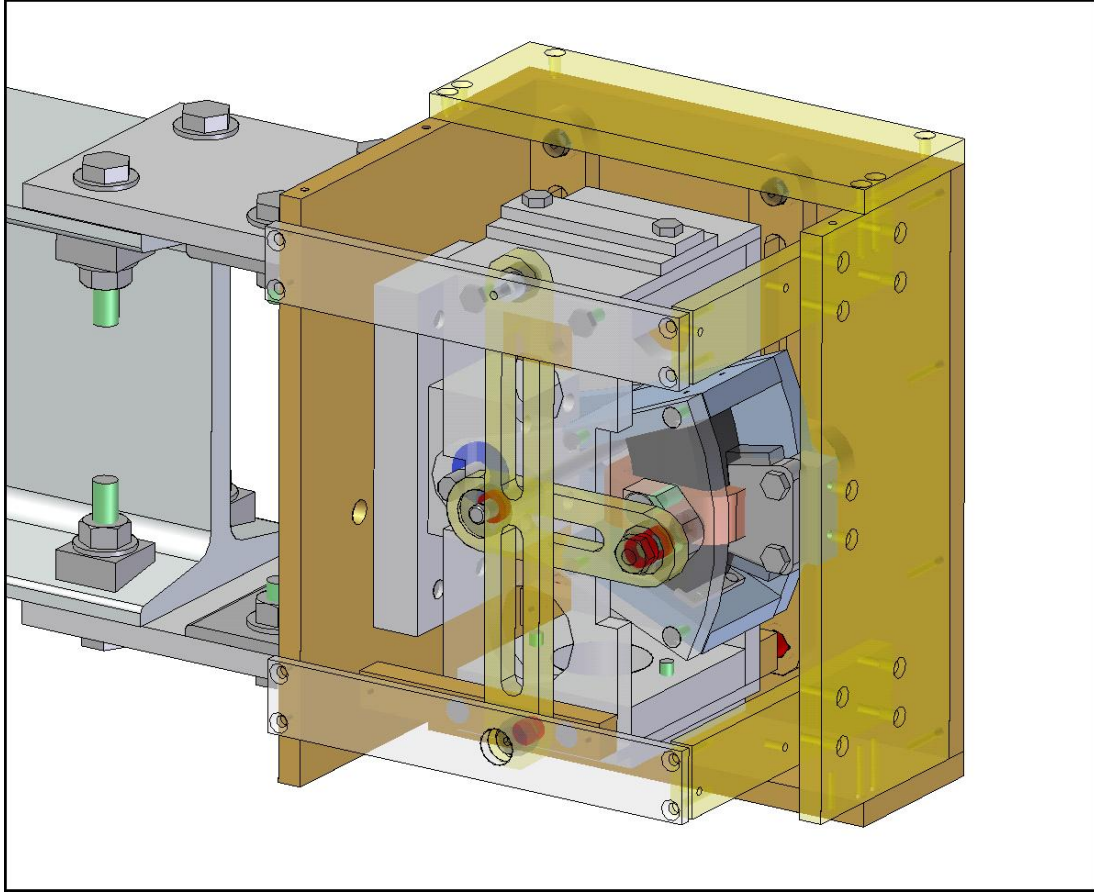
View of assembled prototype device showing the internal linkage installed in the frame, and the entire assembly mounted to the test stand arm.
